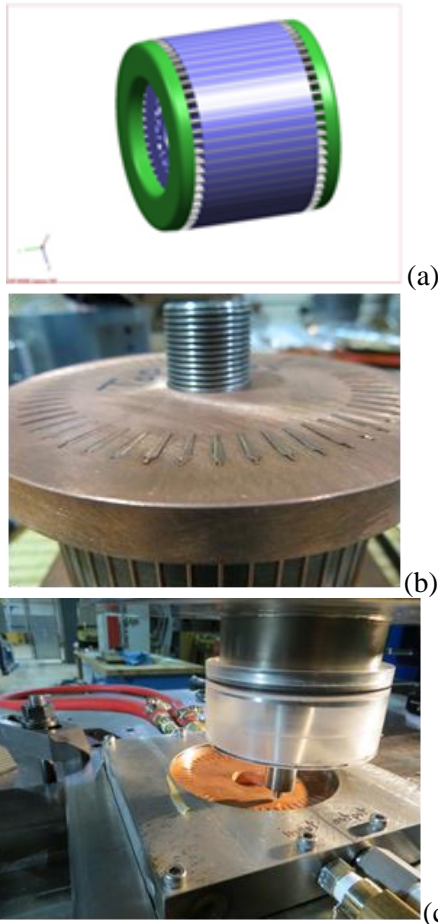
(a) Rotor schematic, (b) copper end ends prior to joining, and (c) friction-stir tool and rotor in fixture prior to welding.
